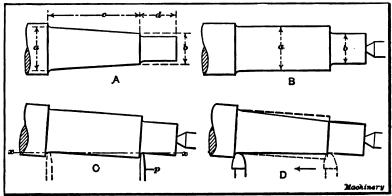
Setting Work for Taper Turning by use of Caliper Gage
